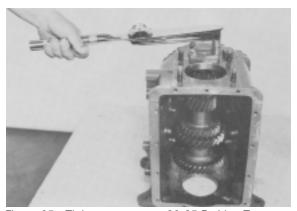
Tighten capscrews 20-25 Ft. Lbs. Torque.
